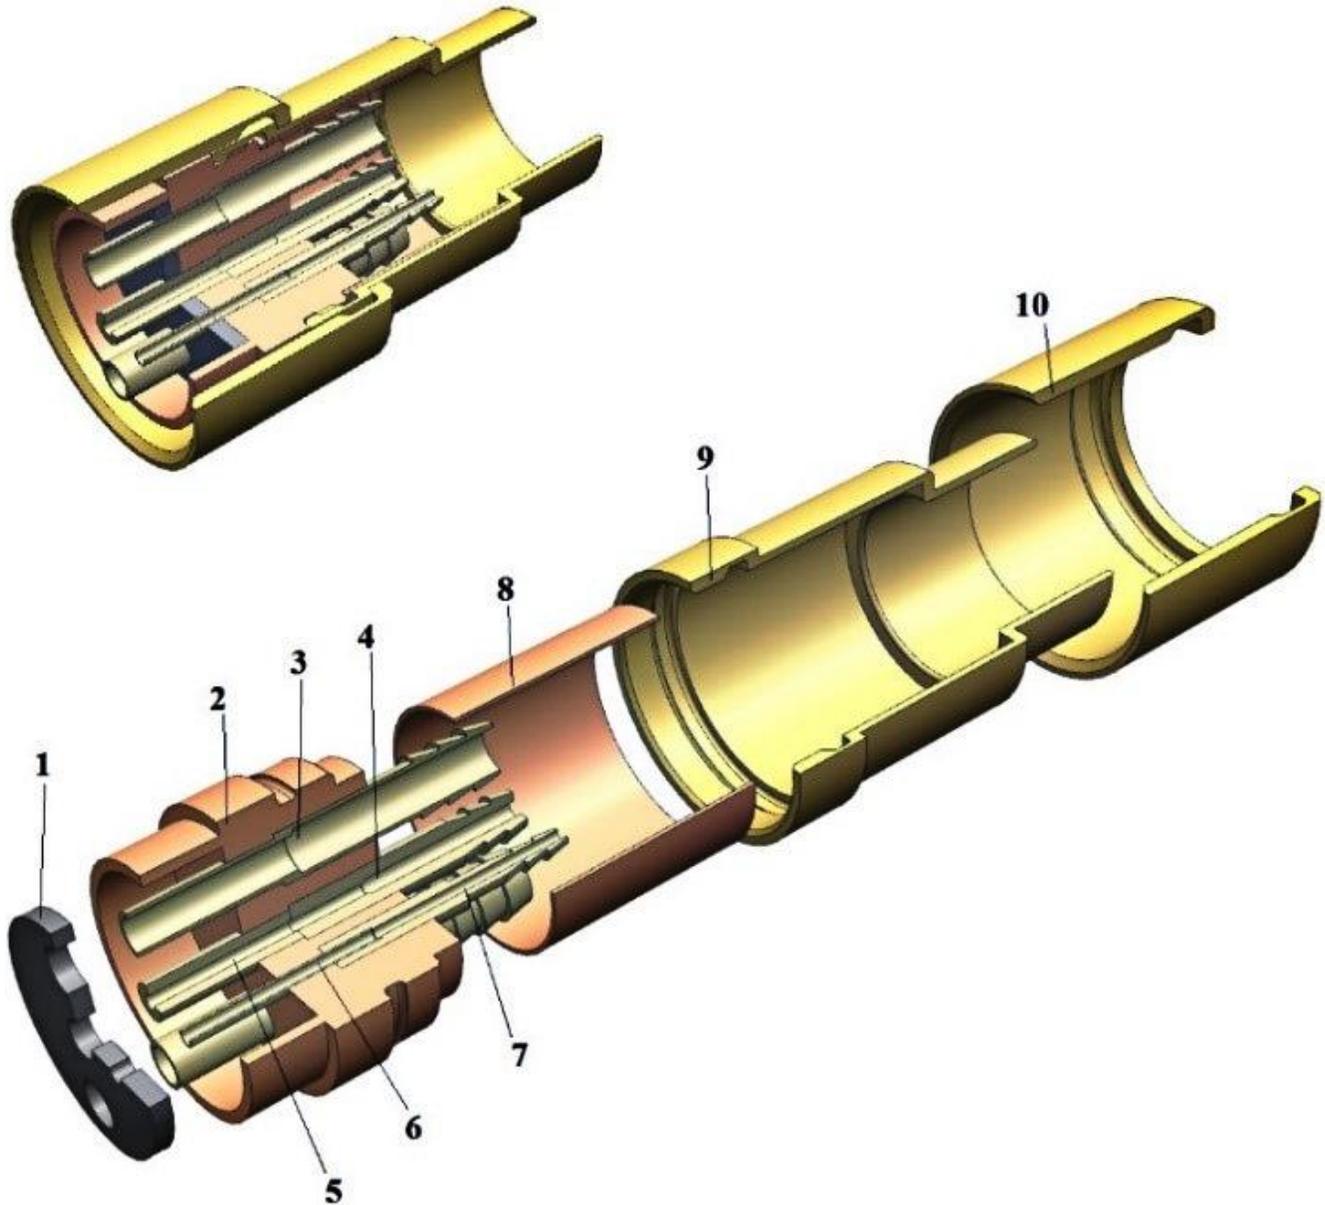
The bottom section: 1 – gasket, 2 – base plug, 3 – water cooling fitting, 4 – gas supply fitting, 5 – gas supply fitting tube, 6 – powder supply fitting tube, 7 – powder supply fitting, 8 – tube, 9 – housing, 10 – cup
